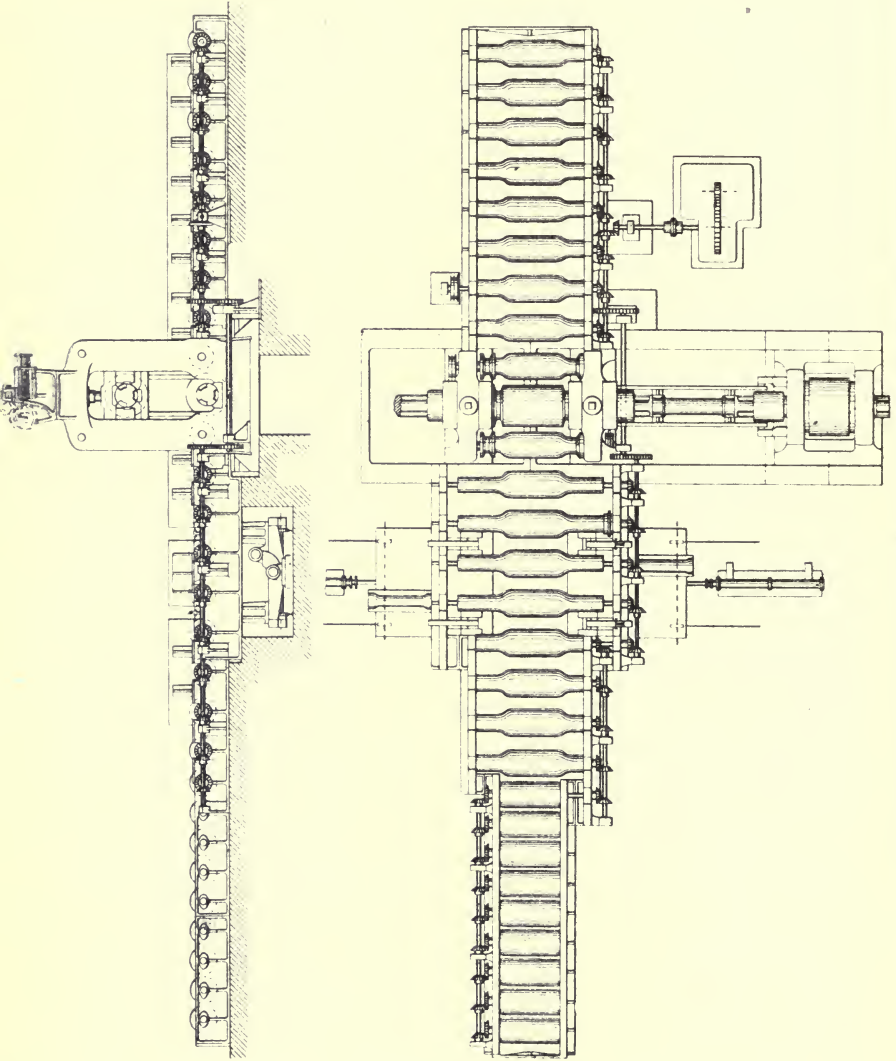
Side Elevation and Plan of 40 in. Slab Coggling Mill.
